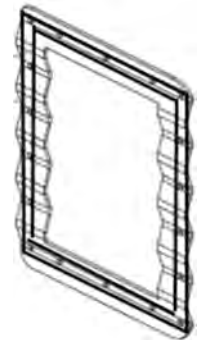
Caulk on inside of bolt plate (Chute not shown for clarity)
